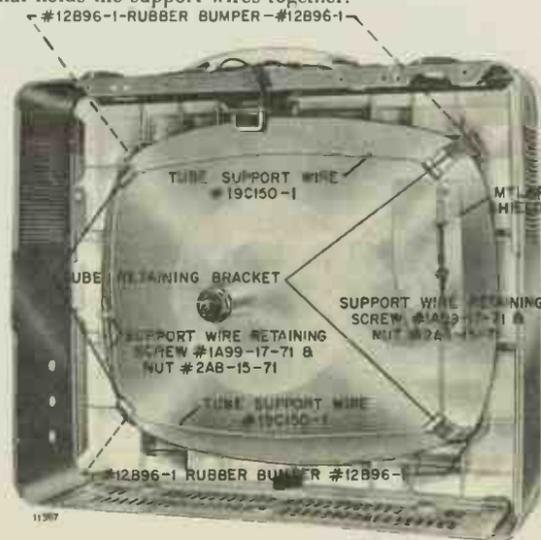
Rear View of Models using Chassis 15D1B with Chassis Removed. Method of picture tube mounting shown.
